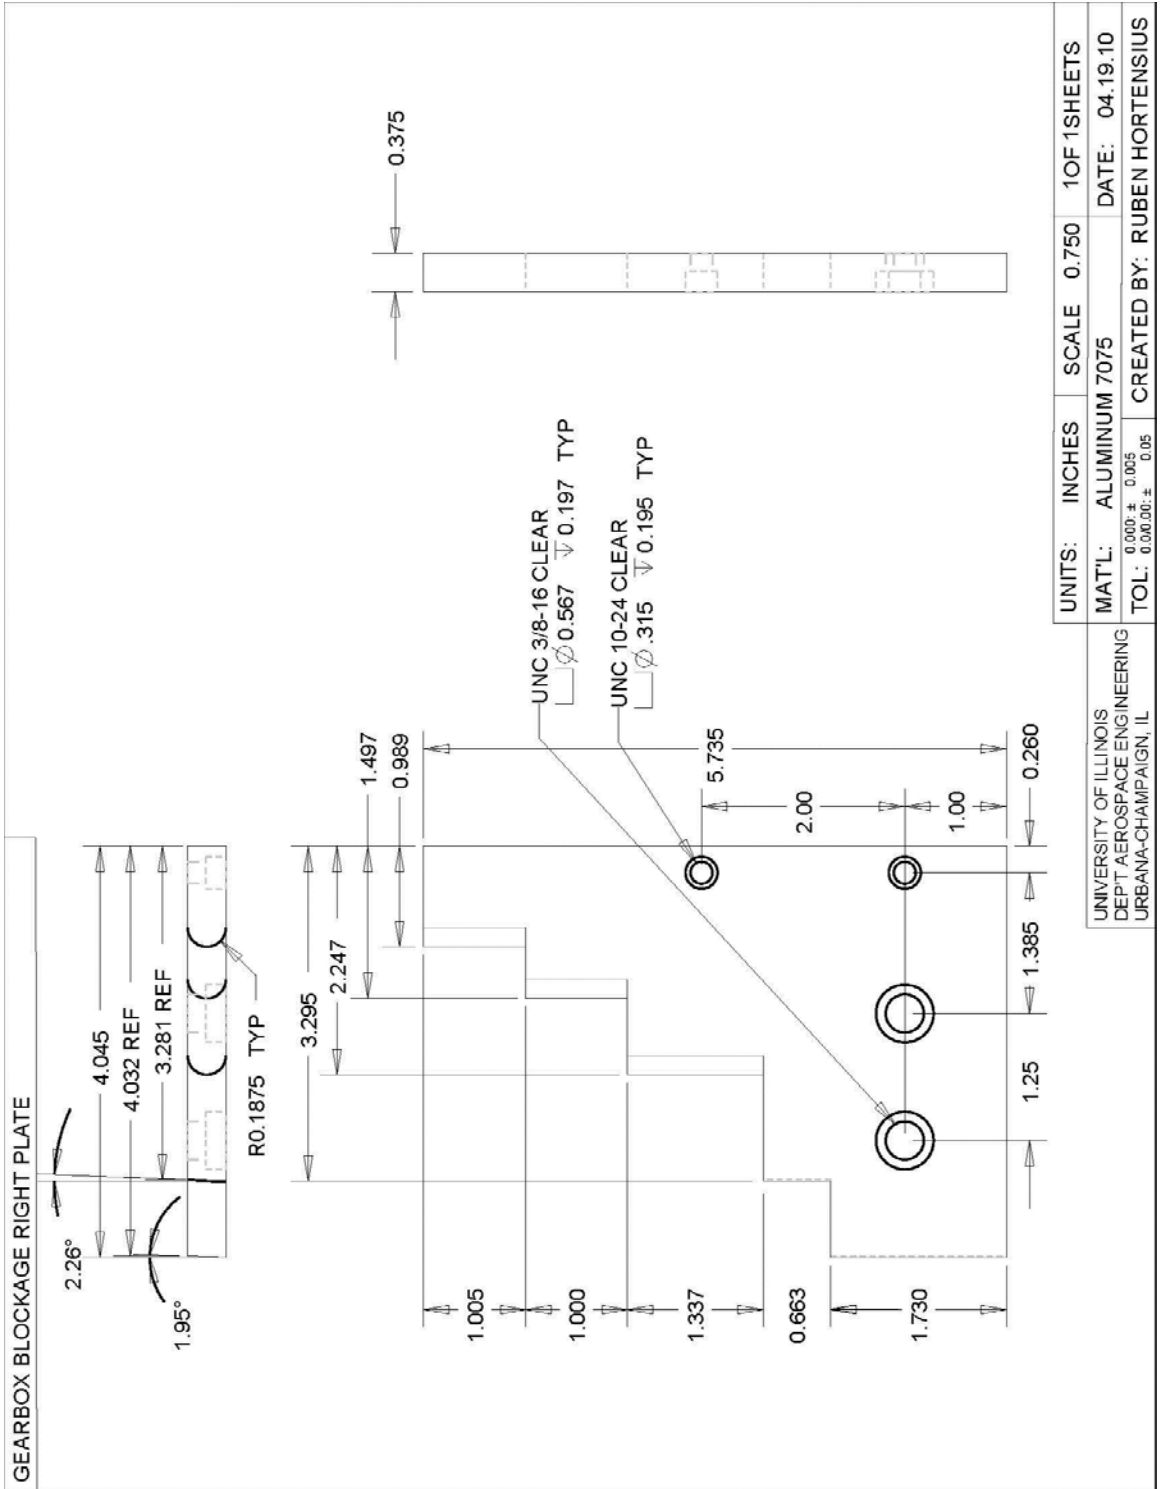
Gearbox Blockage Right Plate Engineering Drawing.
